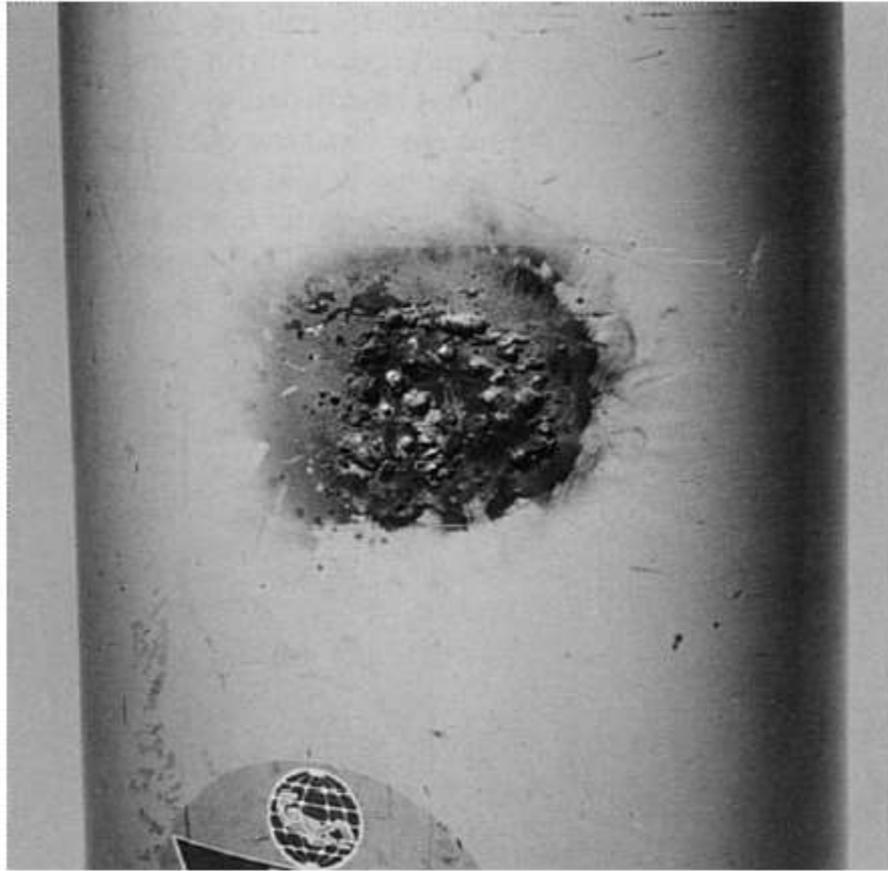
Appearance of fire or welding damage done to a cylinder.
